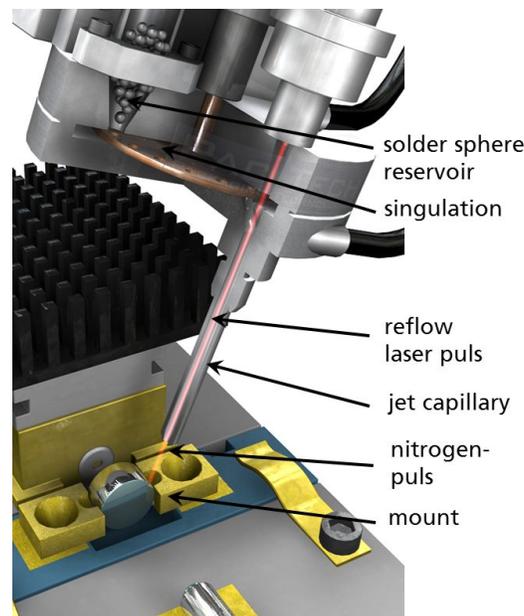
Schematic drawing of the Solderjet bond head able to solder droplets with 6 degrees of freedom (DOF).
